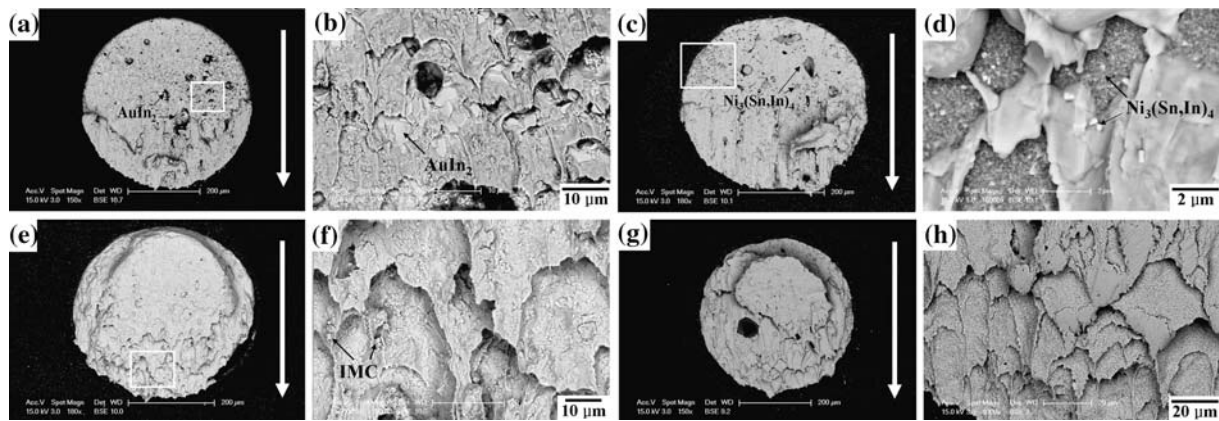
SEM micrographs of fracture surfaces of the shear-tested Sn-48Sn (wt.%) BGA solder joints with four different surface finishes over an underlying Cu pad after bonding: a E-NG, b
